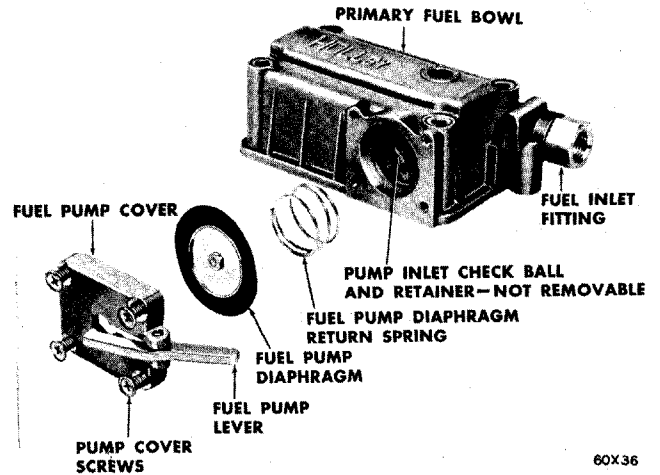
Accelerator Pump (Fuel Pump — Exploded View)
